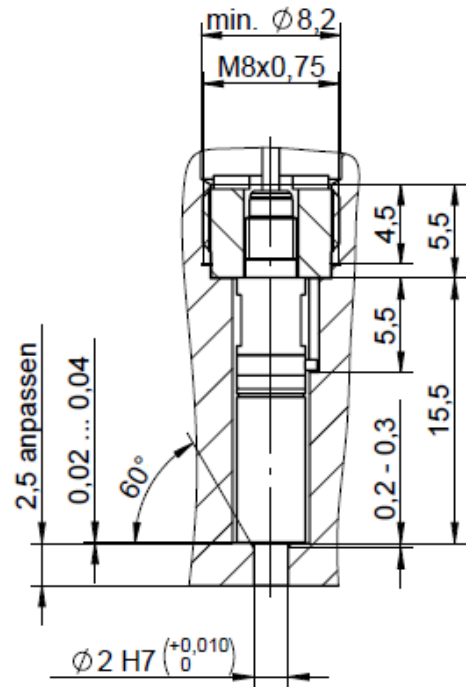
Optional installation with mounting nut Type 6460A1 and key way pin Type 65001430
